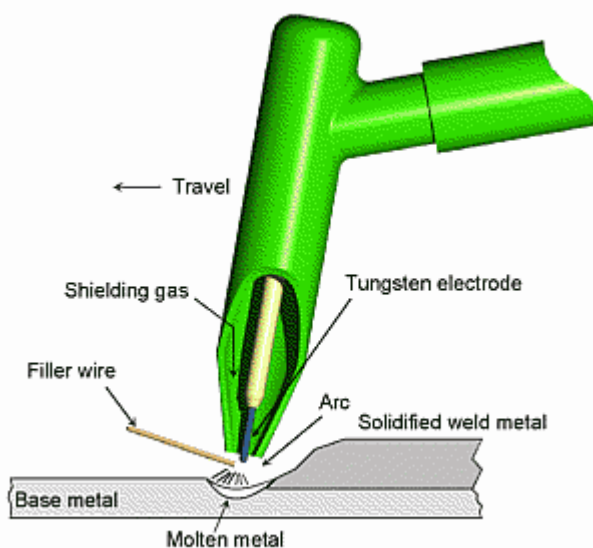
Schematic Illustration of the TIG Welding Torch
